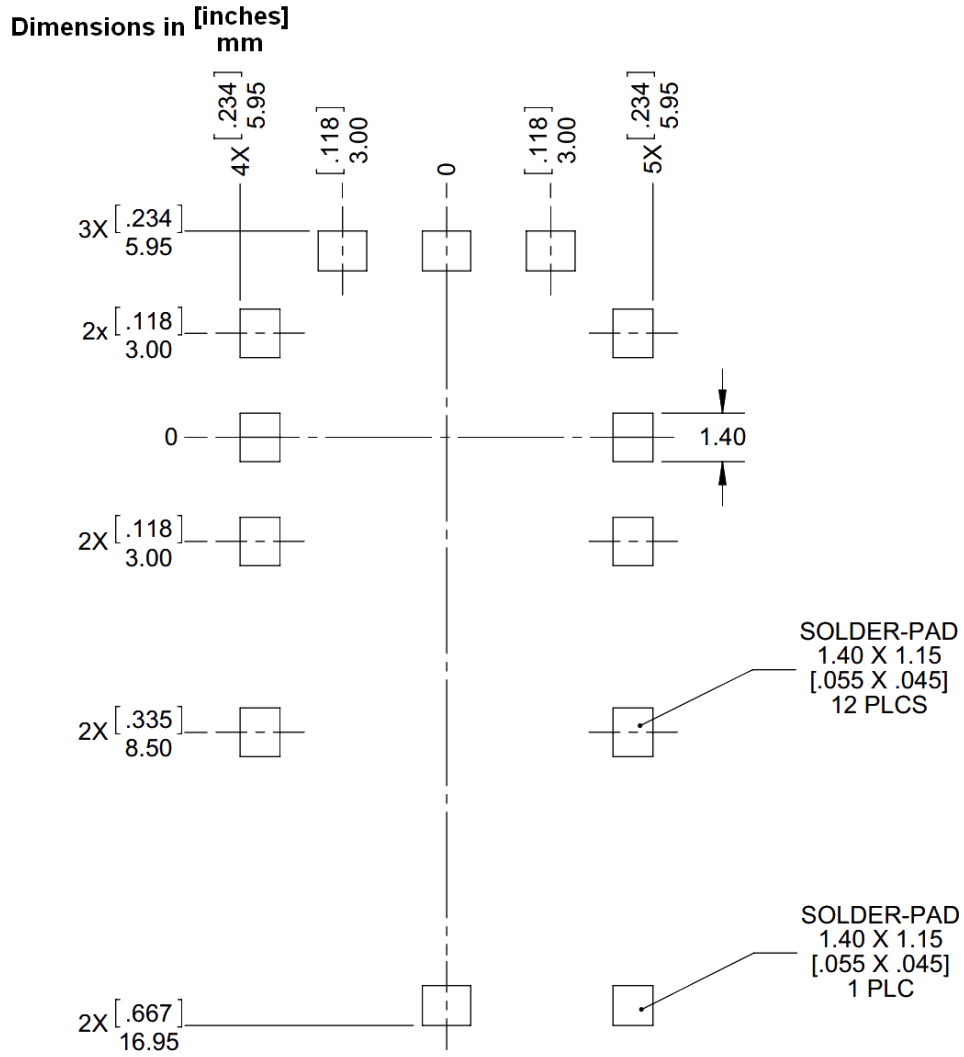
SENtral Blue M&M Solder Pad Layout
